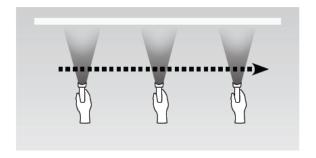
Spray Gun kept perpendicular to the surface [27].
